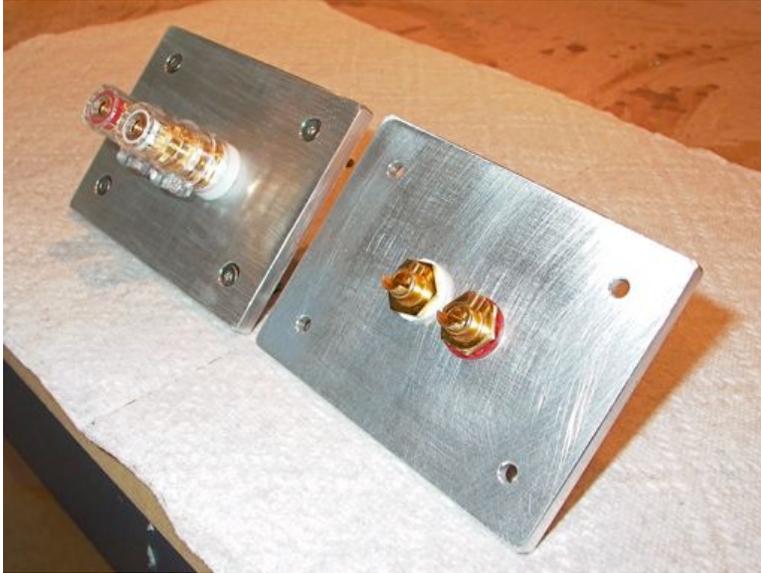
Binding post plates were machined from ¼-inch (6.35 mm) thick 6061-T6 aluminum, into which WBT binding posts were mounted.
